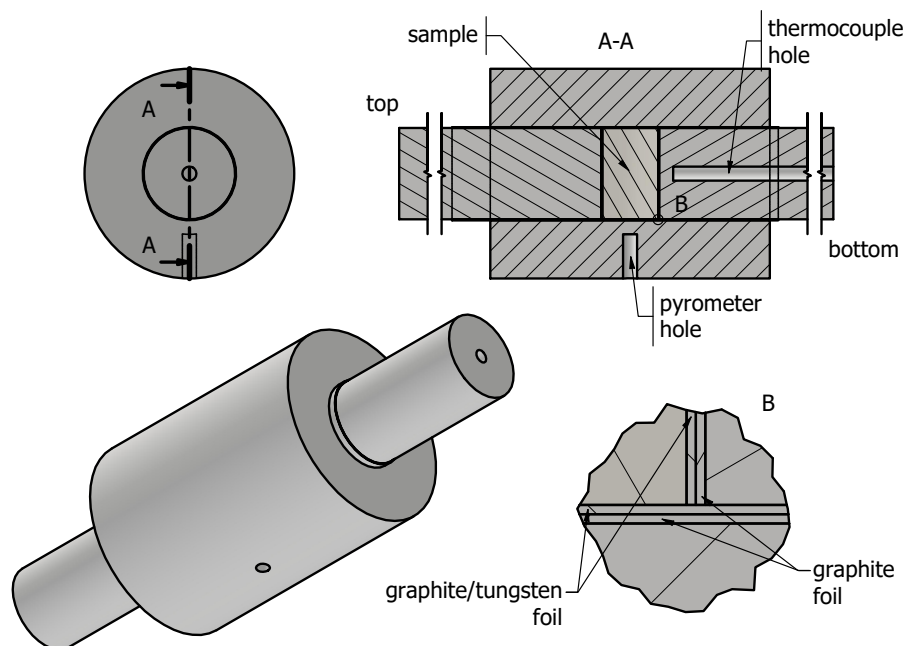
A schematic drawing of the FAST die assembly for a typical sintering run.
